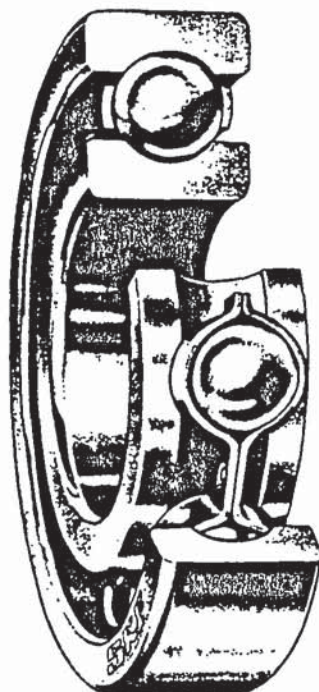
A Single Row, Deep Groove Conrad Assembly.
